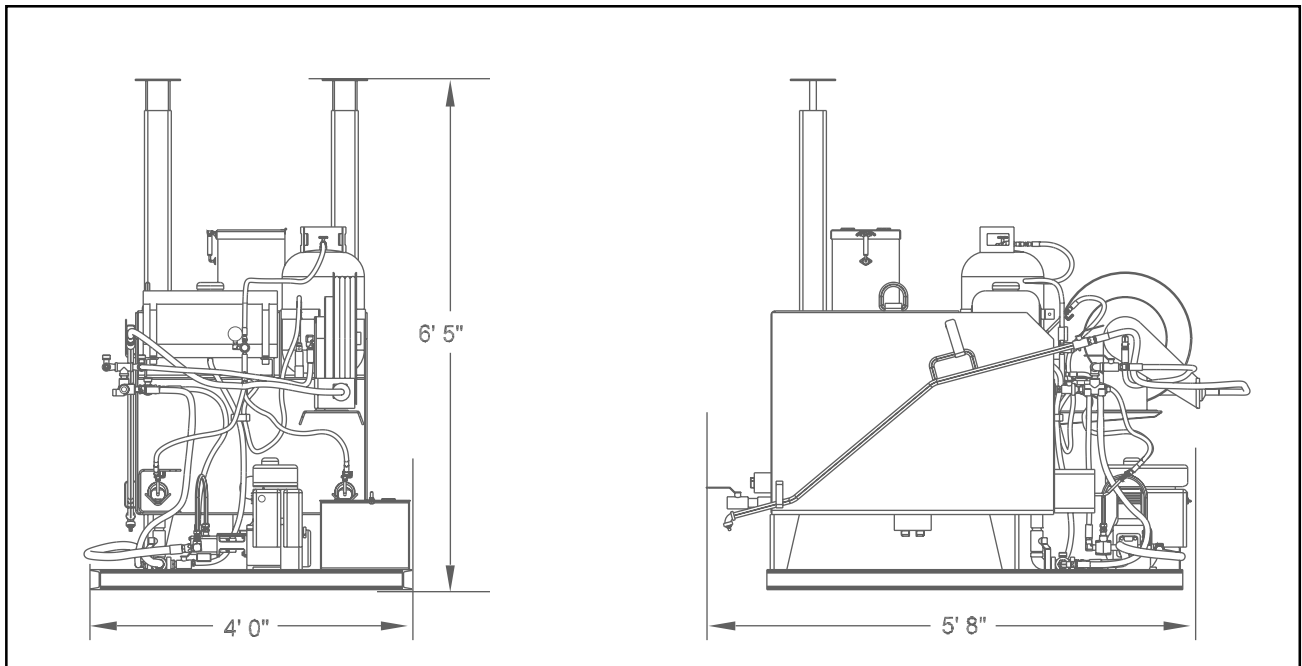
OUTLINE DIMENSIONAL DRAWING - L150S
